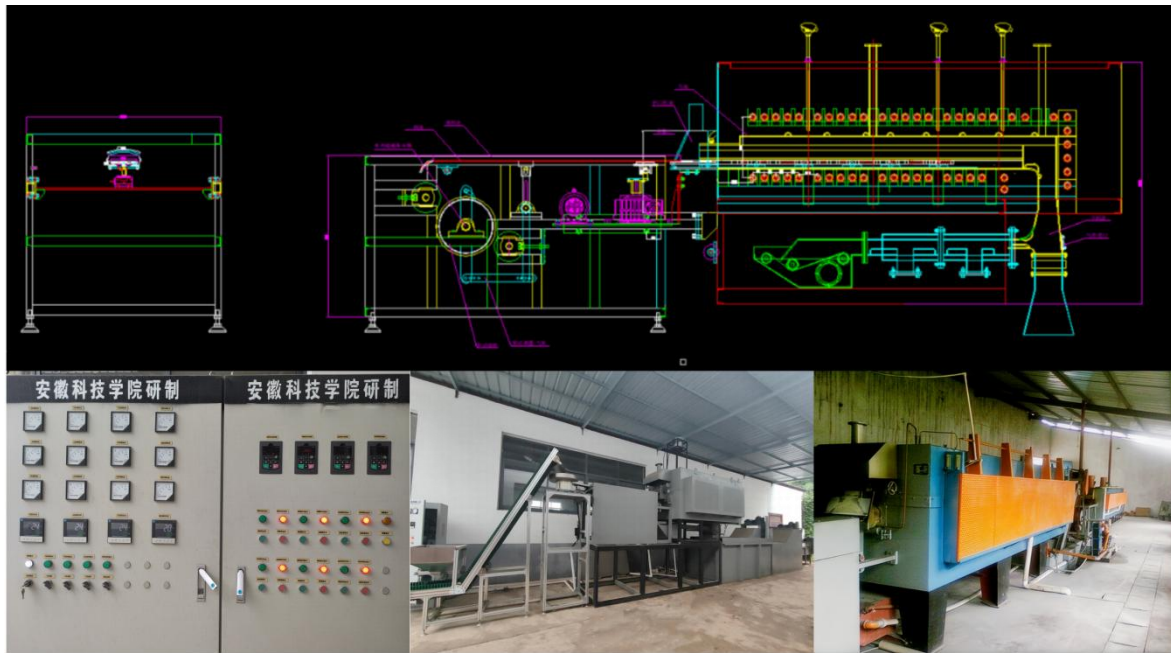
Quenching Equipment Two-dimensional Drawing and Actual Prototype Display
